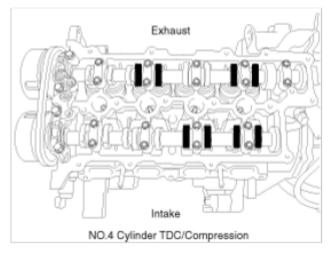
Identifying Intake And Exhaust Valves Clearance (No. 4 Cylinder TDC/Compression) Courtesy of HYUNDAI MOTOR AMERICA
